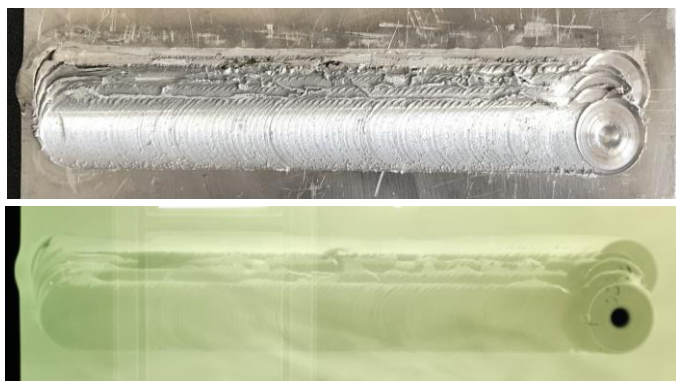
Top surface appearance and Rx image - SFSP processed material - EN AW 6082 (5mm)
